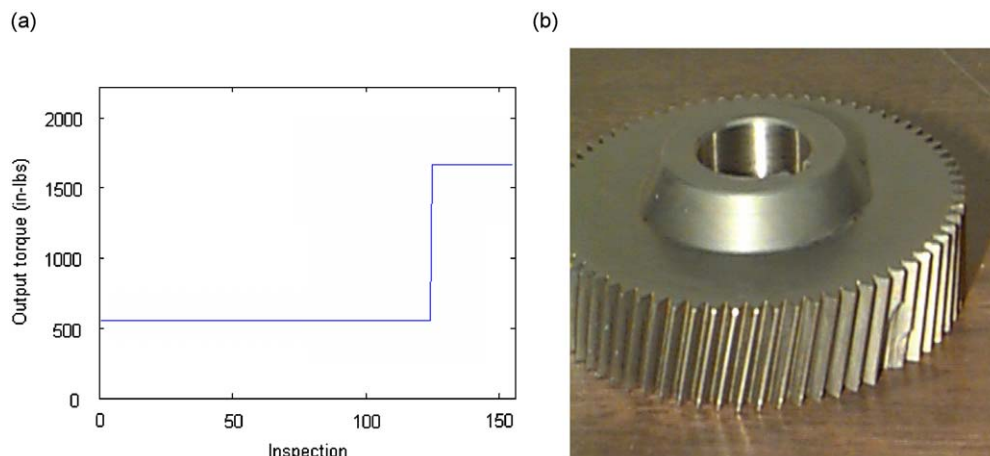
Load condition and the drive gear of TR#12. (a) The output torque level switches from 555 in lbs at the 124th inspection to 1665 in lbs at the 125th inspection; (b) drive gear with two broken teeth.
